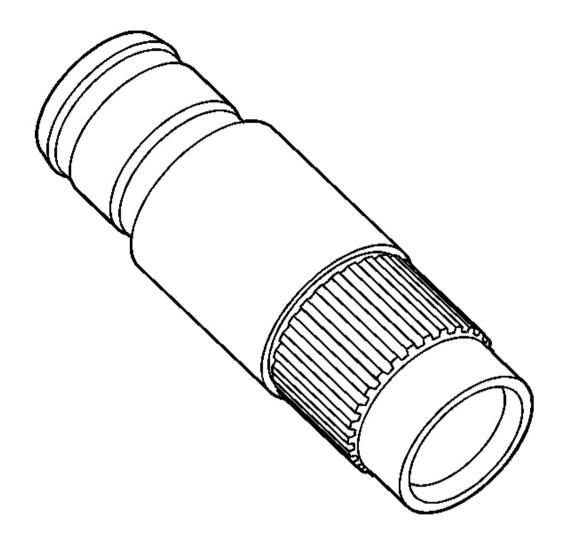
Front Output Shaft Courtesy of GENERAL MOTORS CORP.
